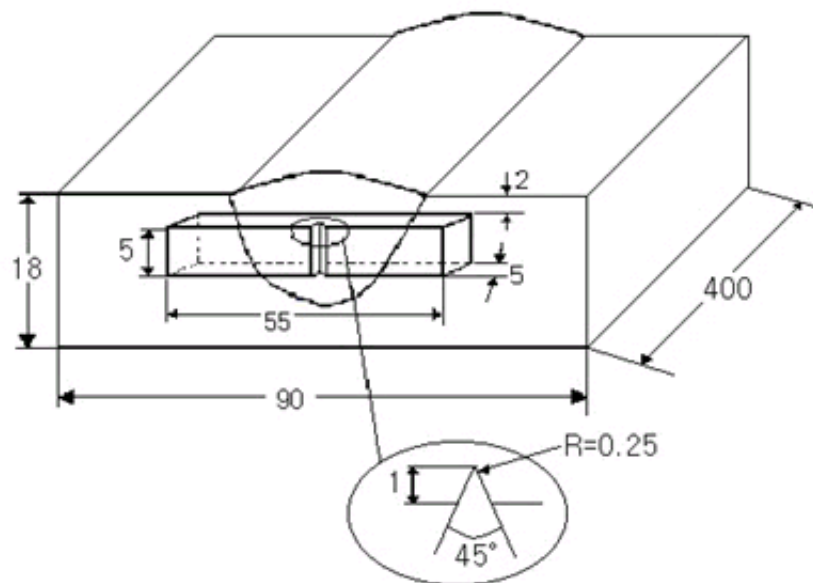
Schematic diagram of Charpy V notch impact test specimens in the weld joint geometry (unit:mm)
